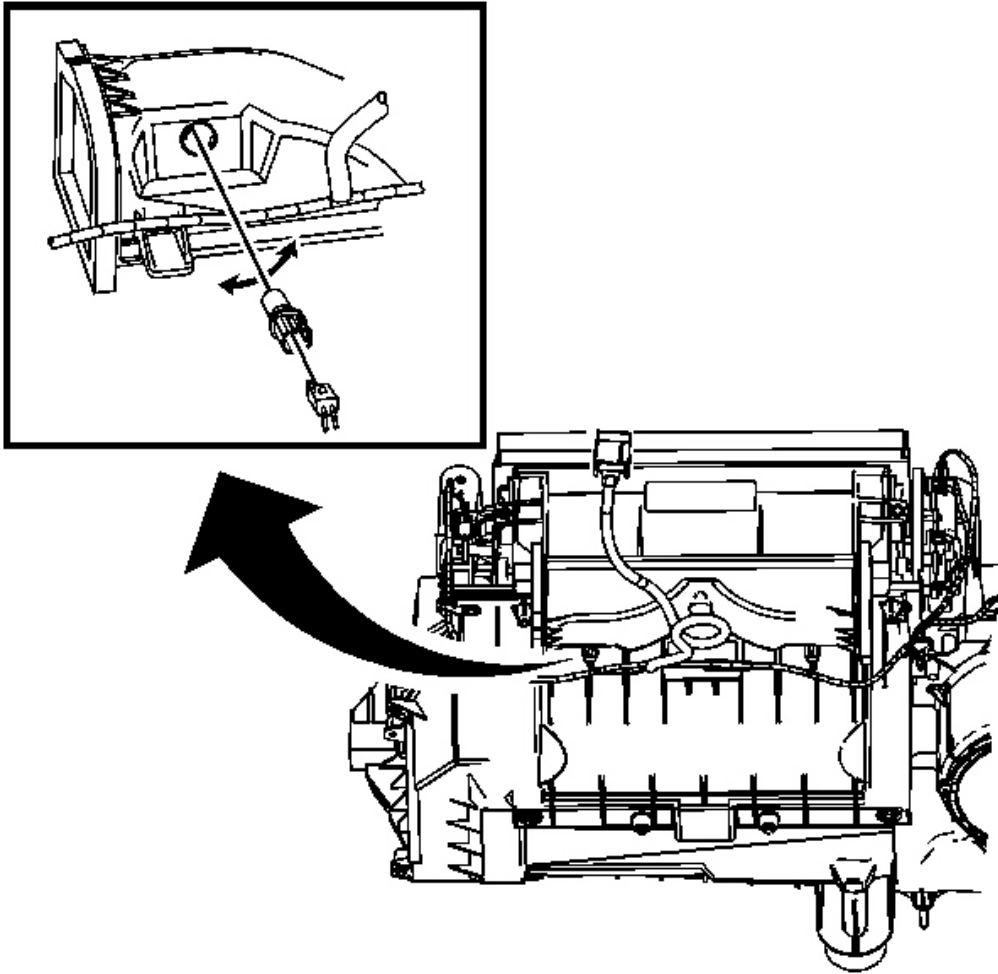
Identifying DTM Sensor & Electrical Connector (Lower Left)
